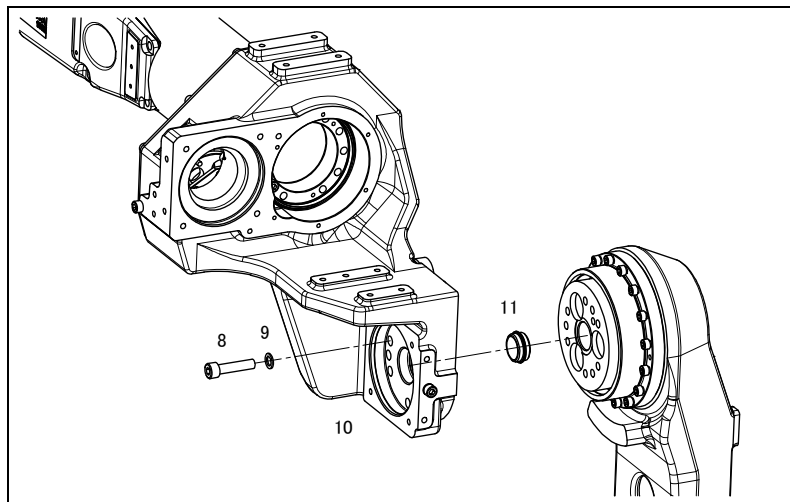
(d) Replacing the J4-axis gearbox unit
